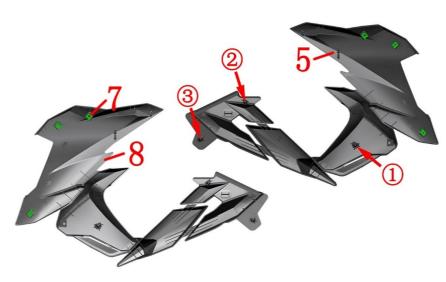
FUEL TANK		Fuel tank cover component	CHK	40)
